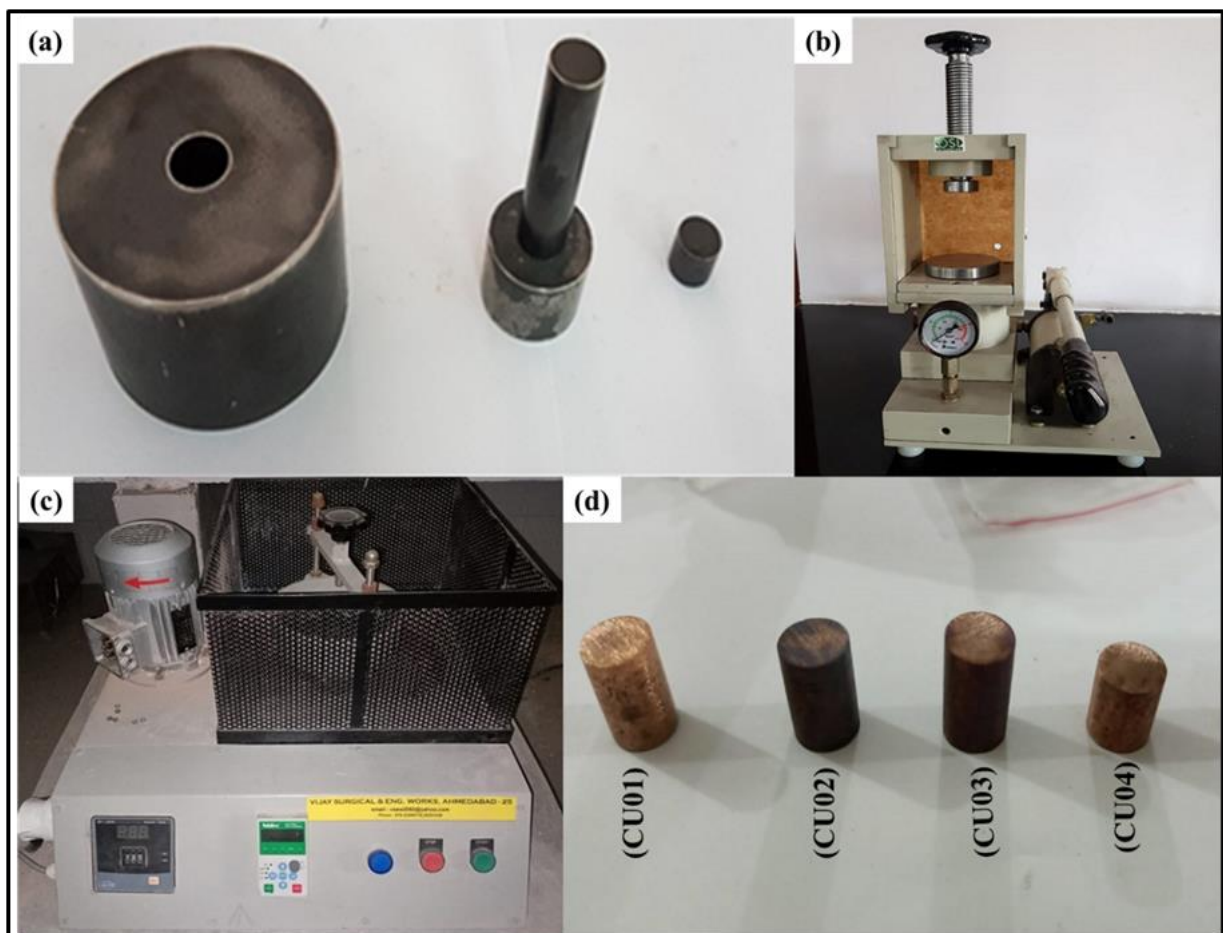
(a) Die, Plunger, and Pallet; (b) Hydraulic Press Machine; (c) Ball Milling Machine; (d) Sintered Specimens
